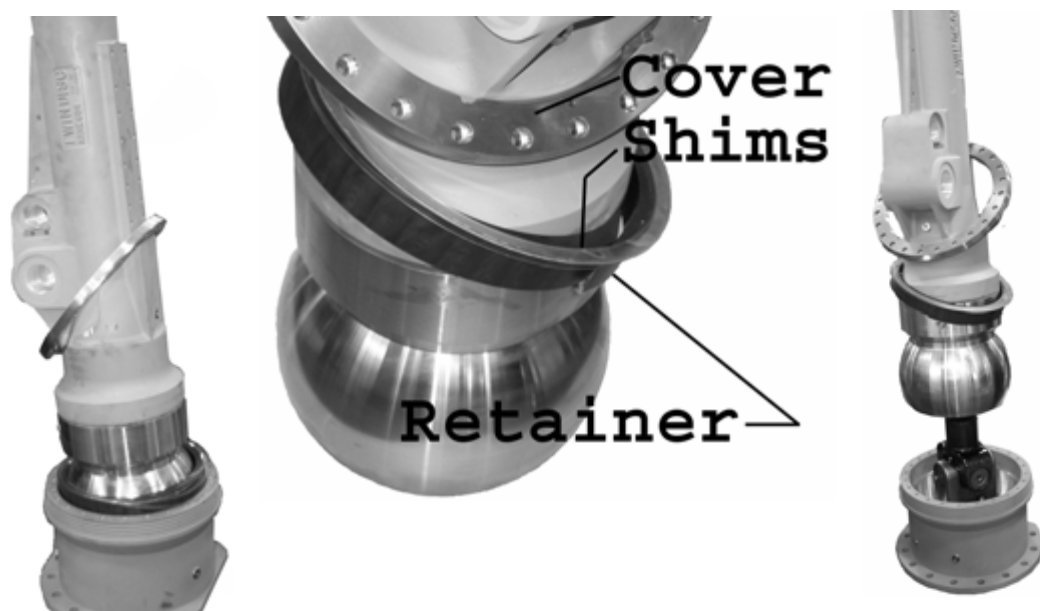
Remove Cover, Shims, Retainer, and Raise Thrust Ball Assembly
